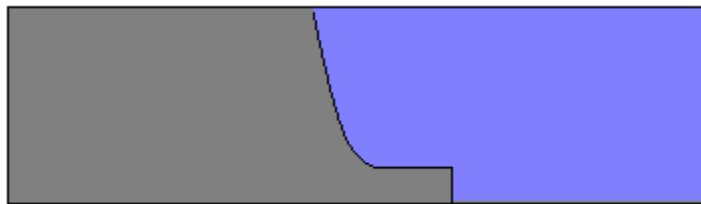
CROSS SECTION, SIDE VIEW OF TWO PANELS USING THE CUP AND CONE DESIGN
